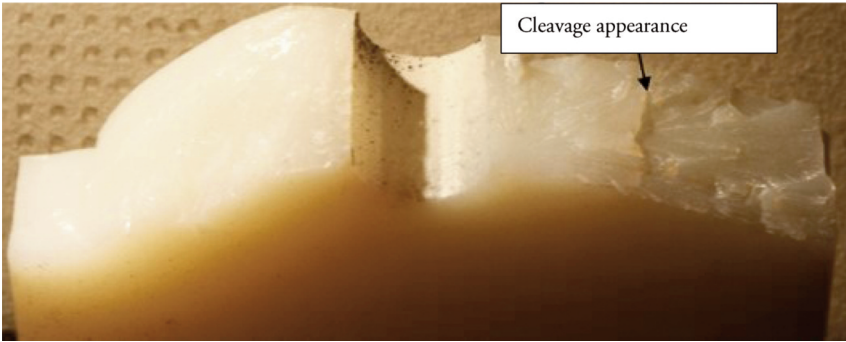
PolyJet rectangular prism with hole specimen with visible macrostructure after the break, cleavage appearance
